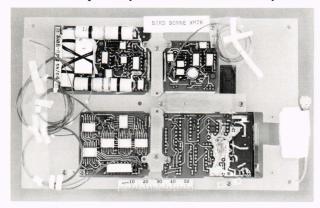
The four circuit boards that comprise the birdborne transmitter, mounted on an assembly fixture. Clearly visible are the six NiCd batteries and the TCXO (rectangular object near the batteries). The encoder is the lower left board; the power supply, the upper two boards; and the 5 and 400 megahertz section, the lower right board (most components are on the reverse side).
